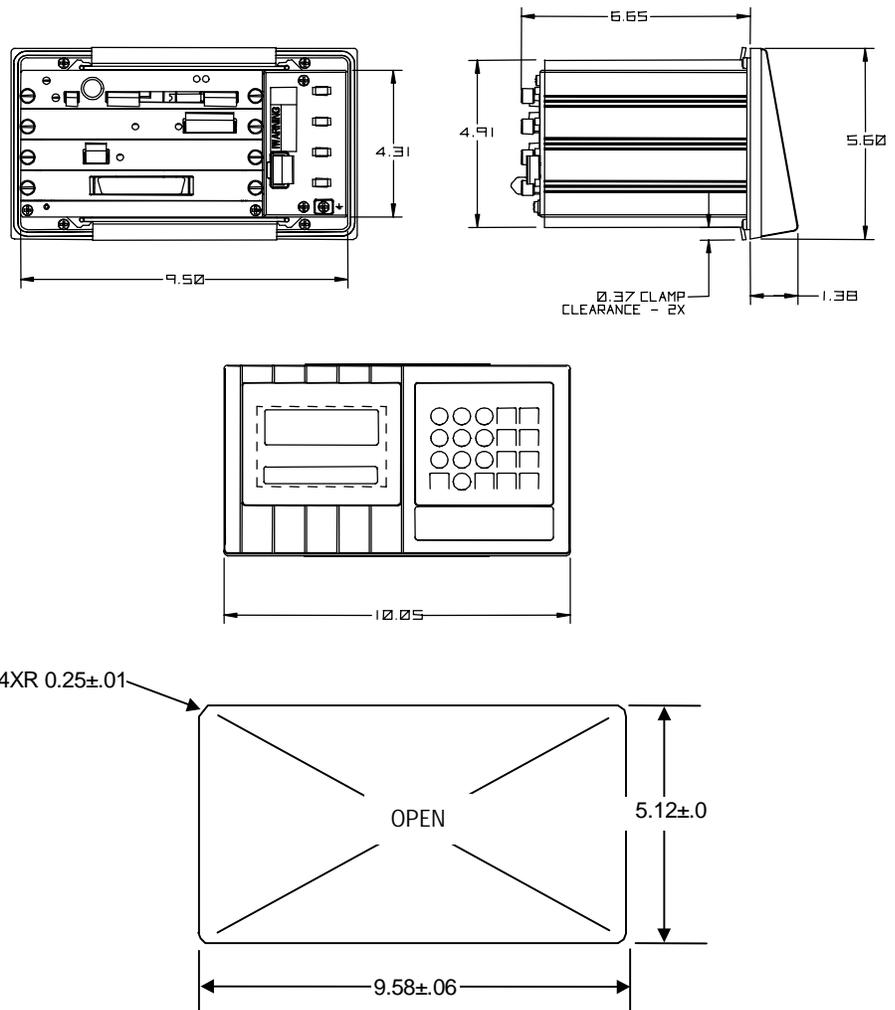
b: JAGXTREME Panel Mount Model and Cutout Dimensions
